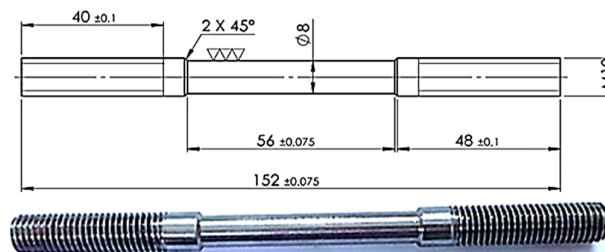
Geometric shape and dimensions of the used tensile specimens
